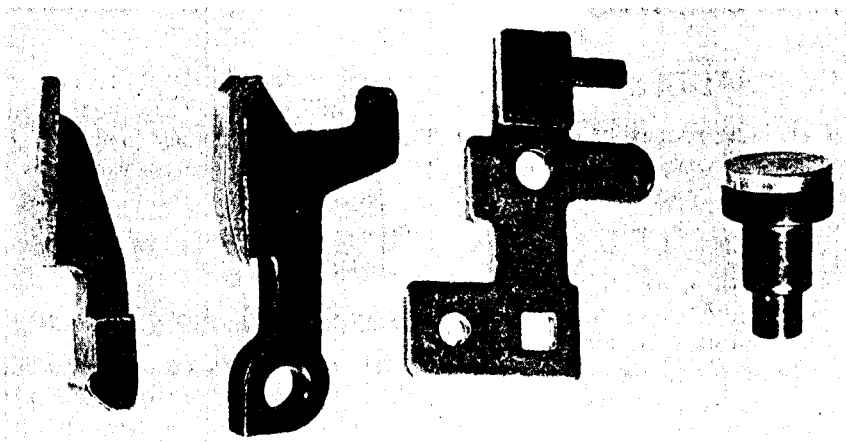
Typical Electrical Contacts Joined by Magnetic Force Percussion Welding
